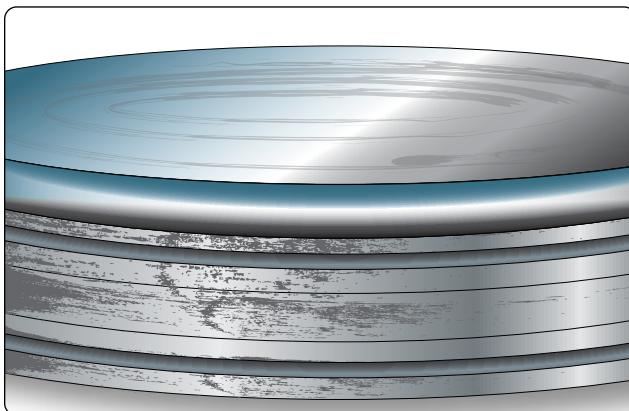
Bearing cups should be tight in the wheel boss and should never rotate. The outside of a bearing cup that was spinning while installed in the wheel is shown.
